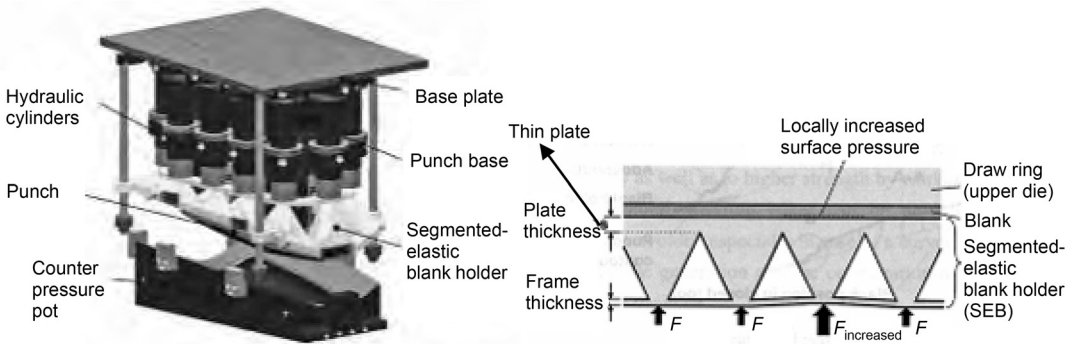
Schematic of die assembly with segmented elastic blank holder for sheet hydroforming with punch. Source: Ref 8.18
